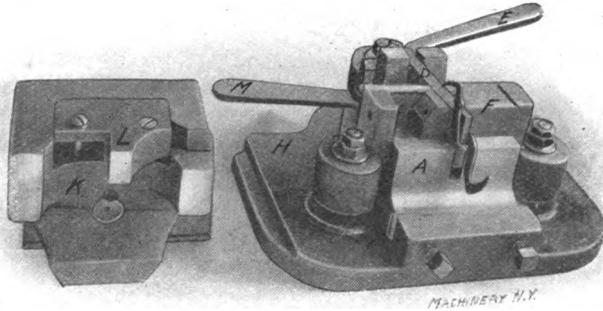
Bending Attachment with Removable Die. Operation Completed.
